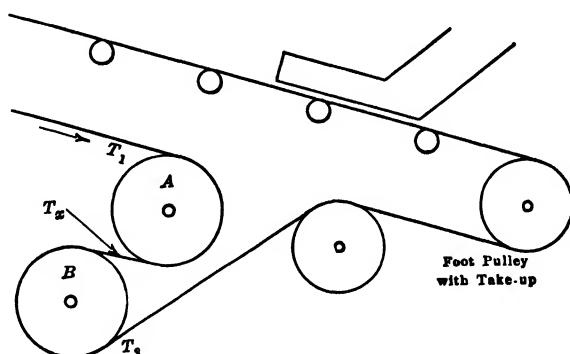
Belt Tensions in a Tandem-pulley Drive.
